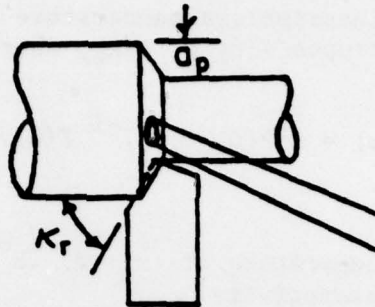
Top view of workpiece laser beam and cutting tool with chip omitted.
